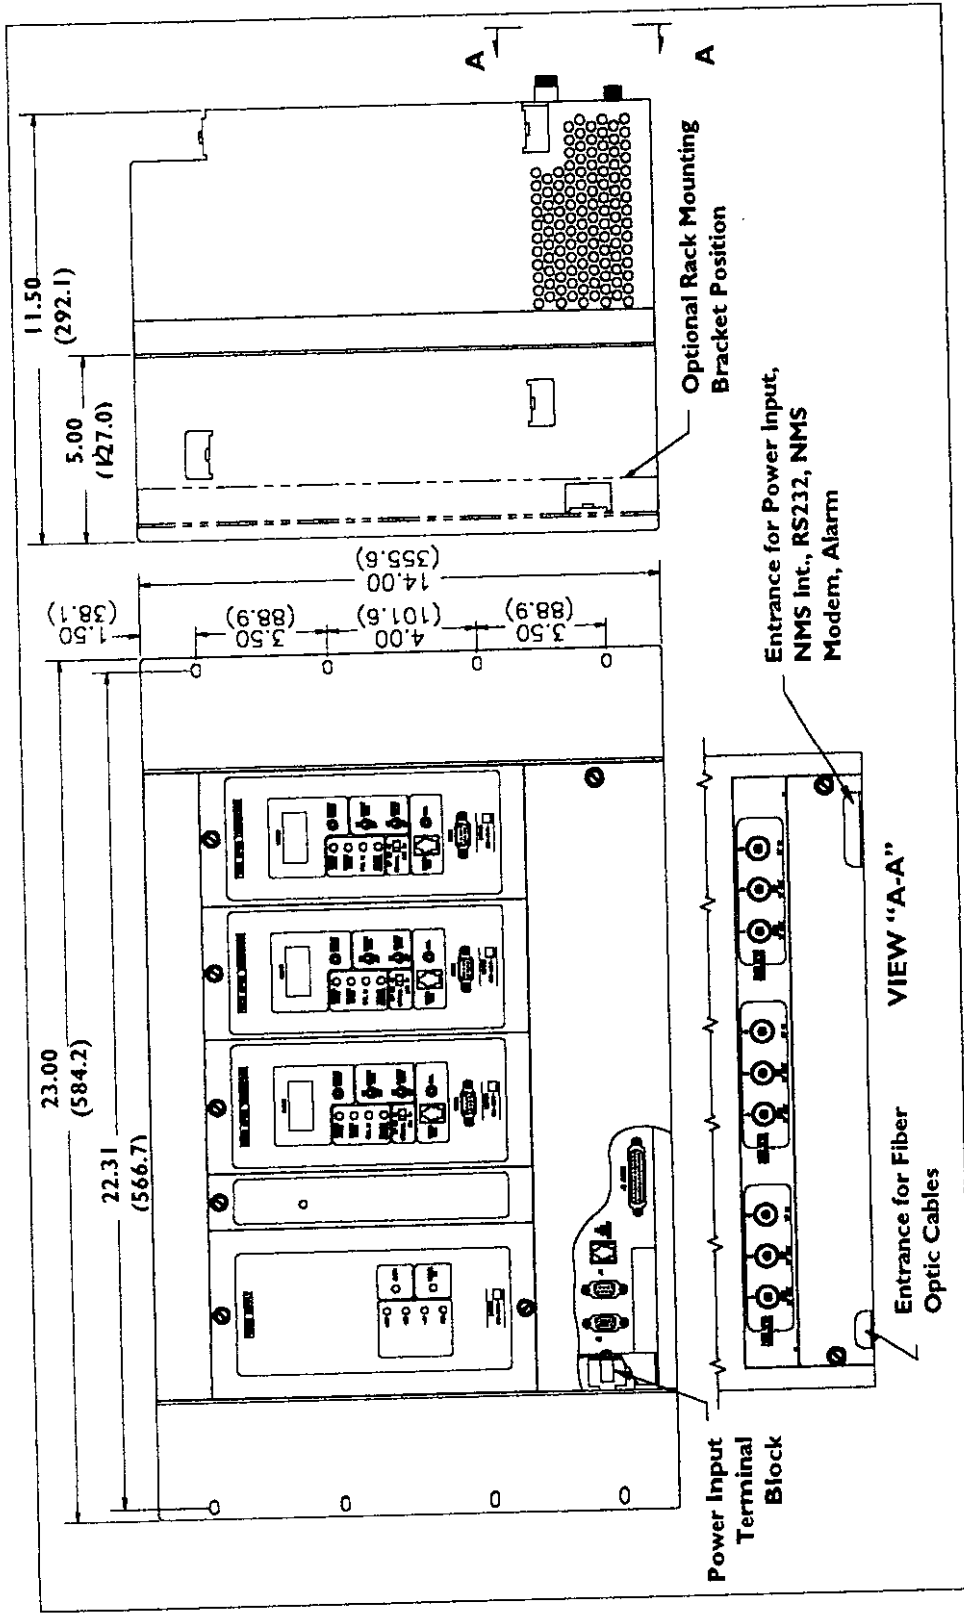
Master Mounting Dimensions for 23-inch Rack
